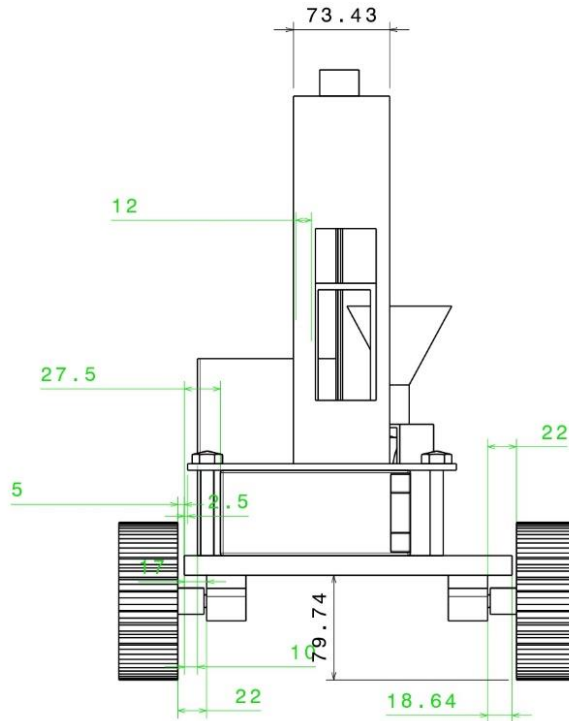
3D Model Assembly of Seed Sowing Machine in CATIA
